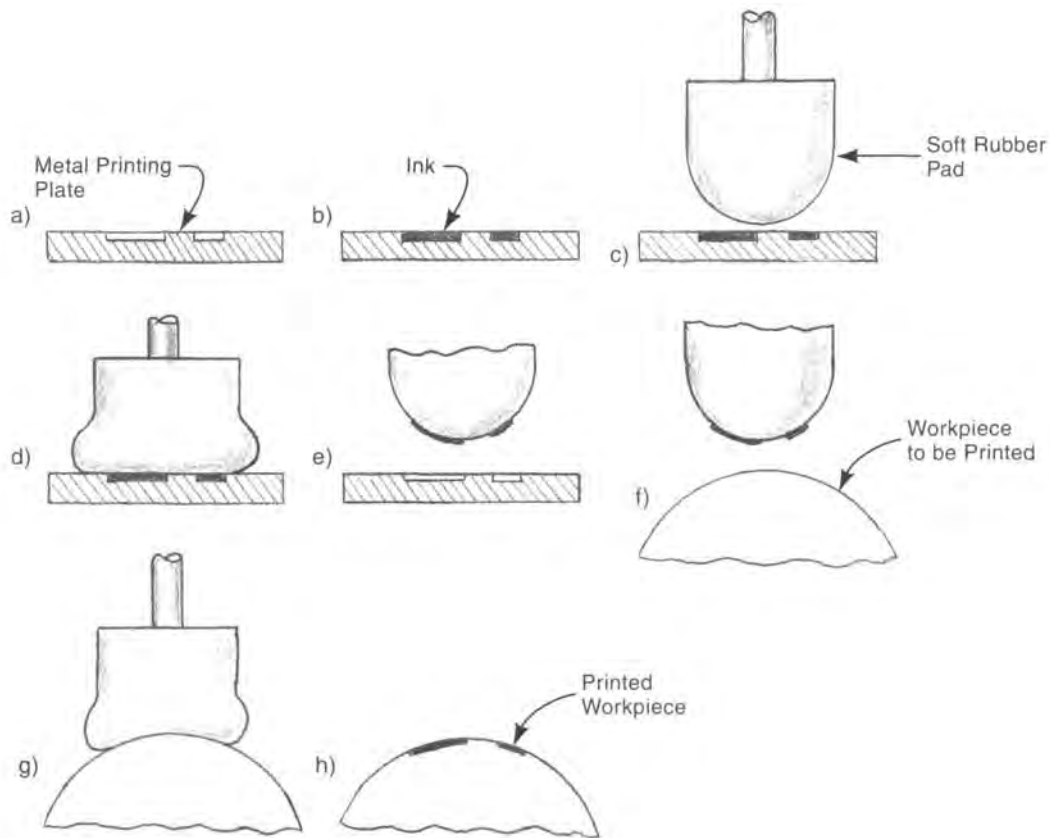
I7a Schematic illustration of the pad printing method of decorating: a) etched printing plate, b) recesses in printing plate filled with ink, c) soft rubber pad in position to contact the printing plate, d) pad pressed against the plate, e) ink transferred from the plate to the pad, f) pad moved to the workpiece, g) pad pressed against the workpiece, h) ink image transferred from the pad to the workpiece.
